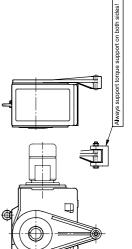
Attaching the torque support on bevel gear and worm gear units
